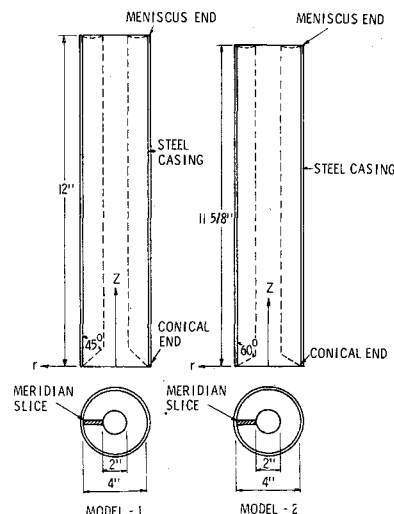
Geometry and dimensions of hollow circular cylinders.
